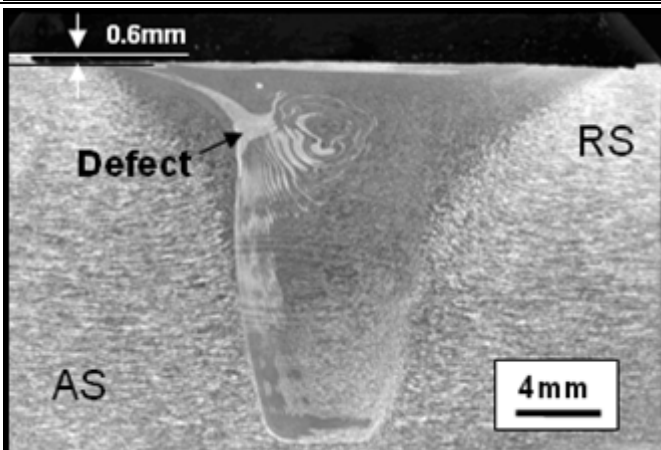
Post-weld profiles showing weld surface quality, using scroll shoulder and tapered thread pin tool; welding parameters as indicated
